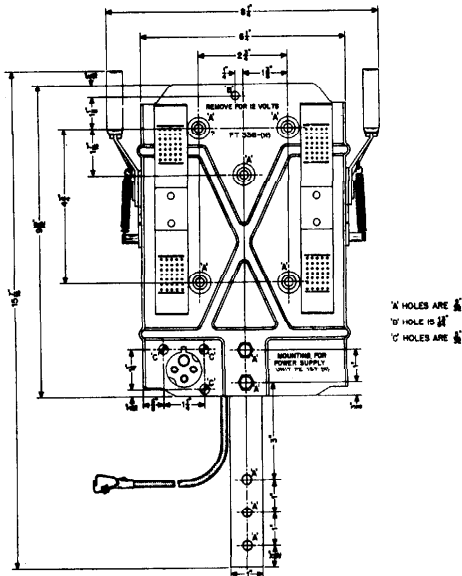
Mounting FT-338-(\*), Outline Dimensional and Mounting Hole Location Detail
